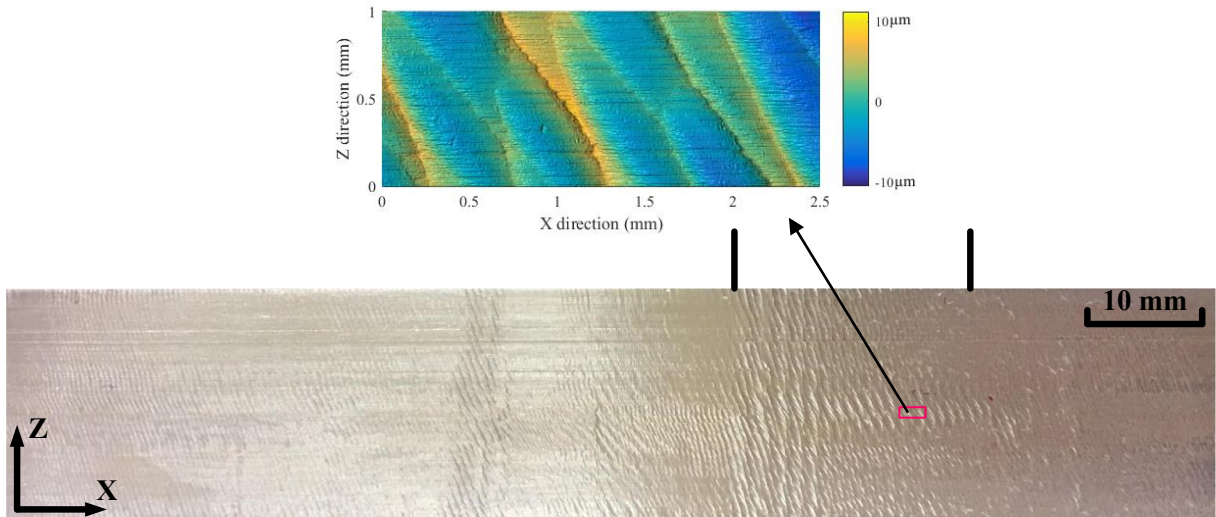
Surface topography of workpiece for the machining parameter (3500 rpm, 20 mm)
